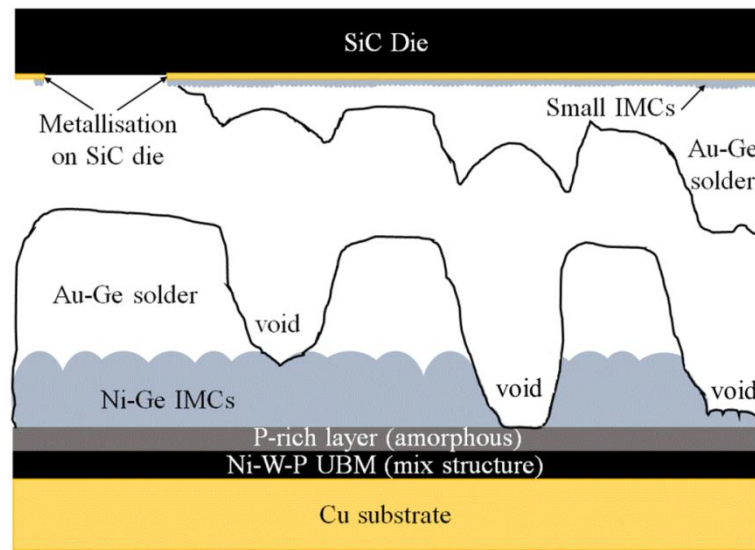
Schematic diagram of the fracture mode for as-built SiC/Au-Ge/Ni-W-P solder joints.
